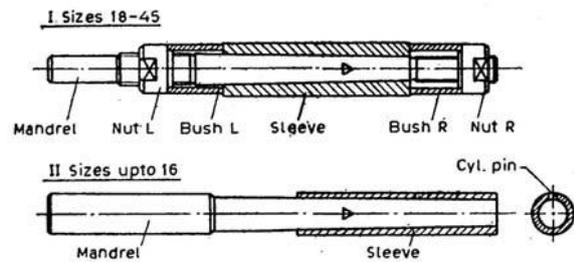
(b) Manual Lapping of internal cylindrical surfaces
